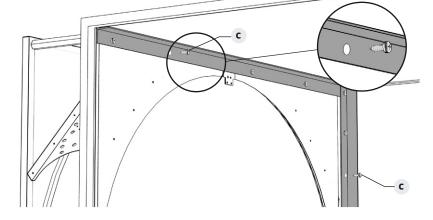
The surrounding frame can be used to connect to the air conditioner unit, provided that screw connections do not deform it. The figure shows a possible mounting option with angles
